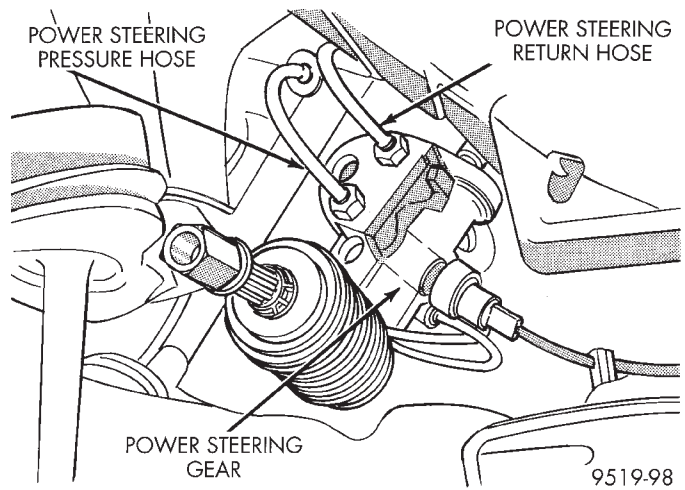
Power Steering Pressure And Return Hose At Steering Gear
